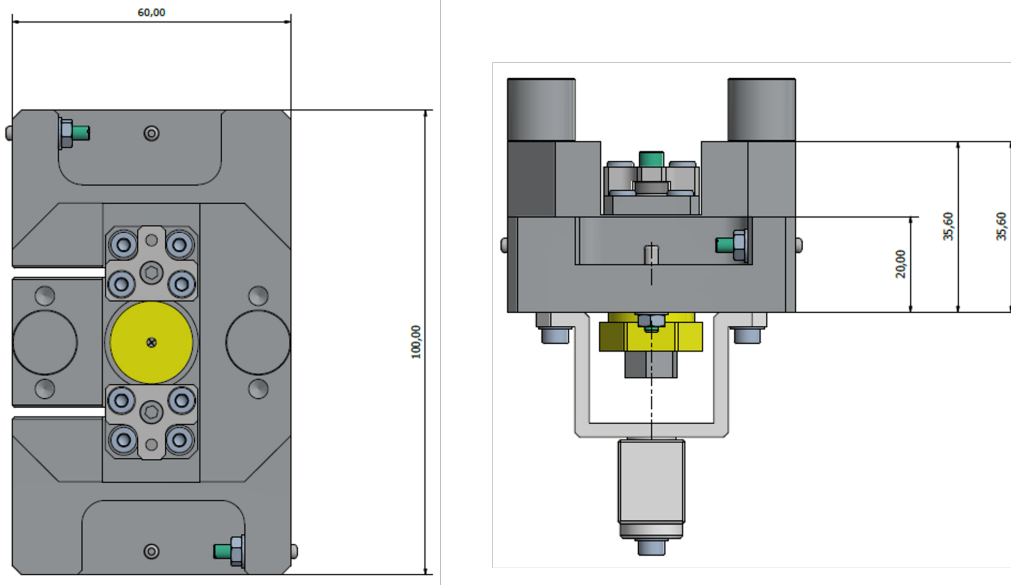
Mechanical drawings of SIPS end payload marionette: on the left the marionette top view is represented, while a side view is shown on the right, with the mechanical support which holds the reflector needed for the optical lever system for the readout of local control.
